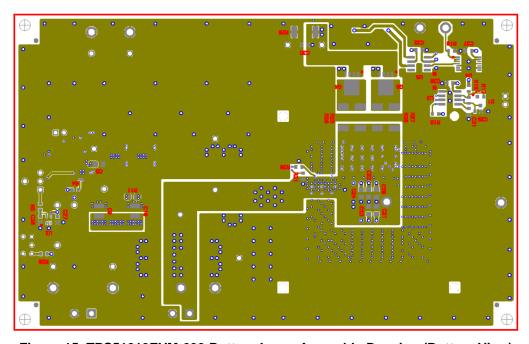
TPS51219EVM-630 Bottom Layer Assembly Drawing (Bottom View)
